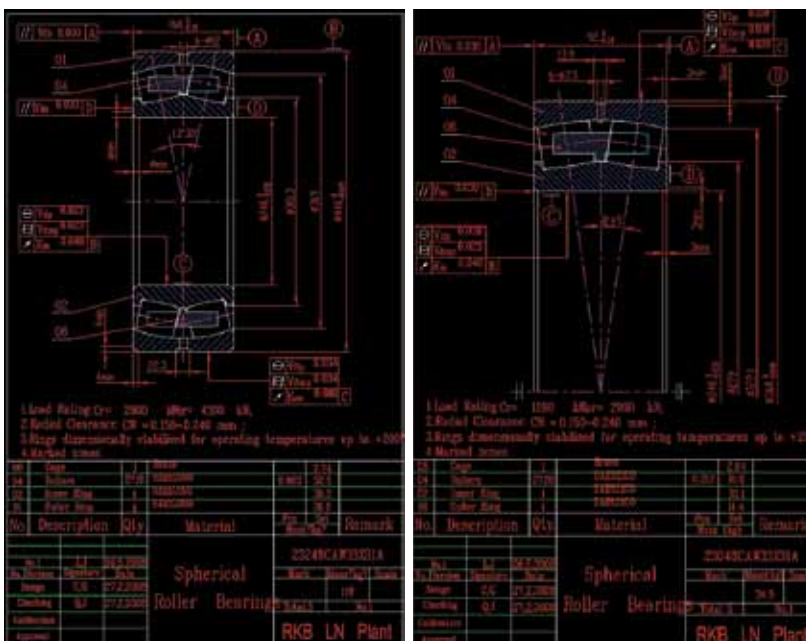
General drawings of spherical roller bearings RKB 23248CAW33XS1A and RKB 23048CAW33XS1A.
